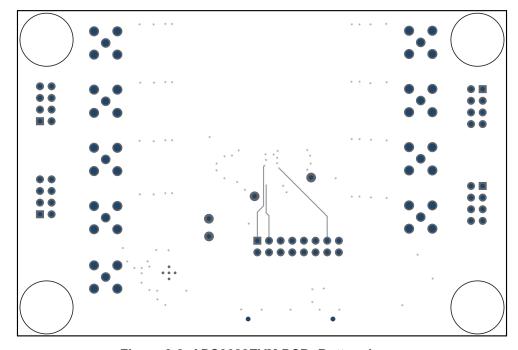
ADS8688EVM PCB: Bottom Layer
